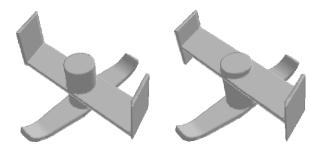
3D geometry of L-shape and T-shape toner blending tools
